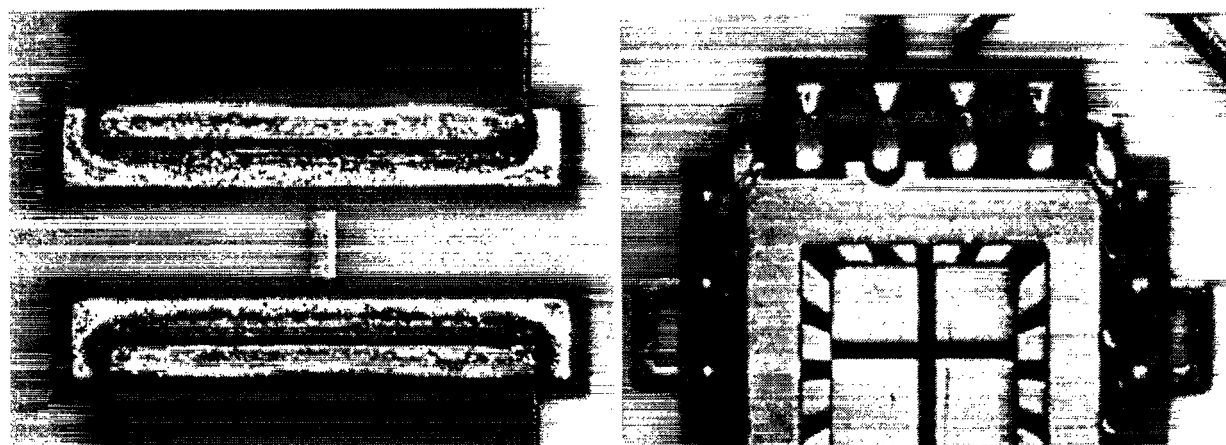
2225 chip capacitor and 16 I/O LCC soldered with SnAgBiAu. Joints have a much grainier appearance although pads and contacts exhibit good joint geometry and good wettability.
